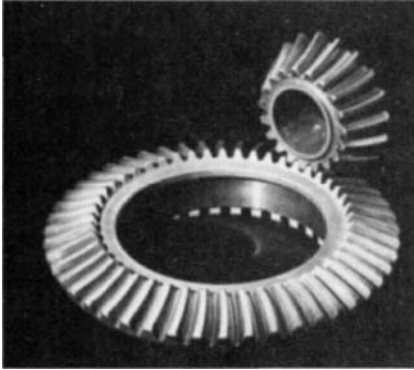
Zerol bevel set. (Gleason Machine Division.)
